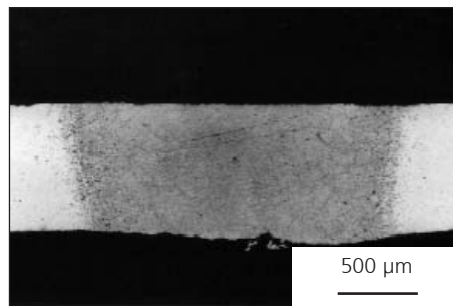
Welding of aluminum thin sheet with very smooth seam
